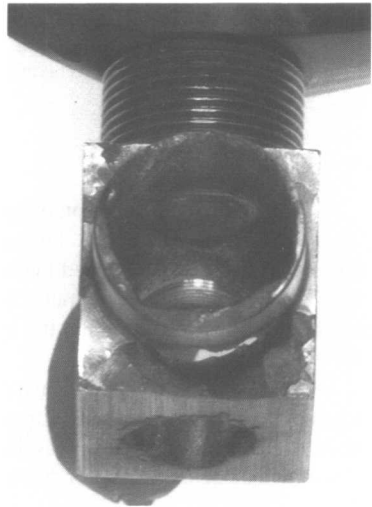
The TFE in the ball valve ignited, burned the valve, and ignited the TFE lining in the outlet hose.
